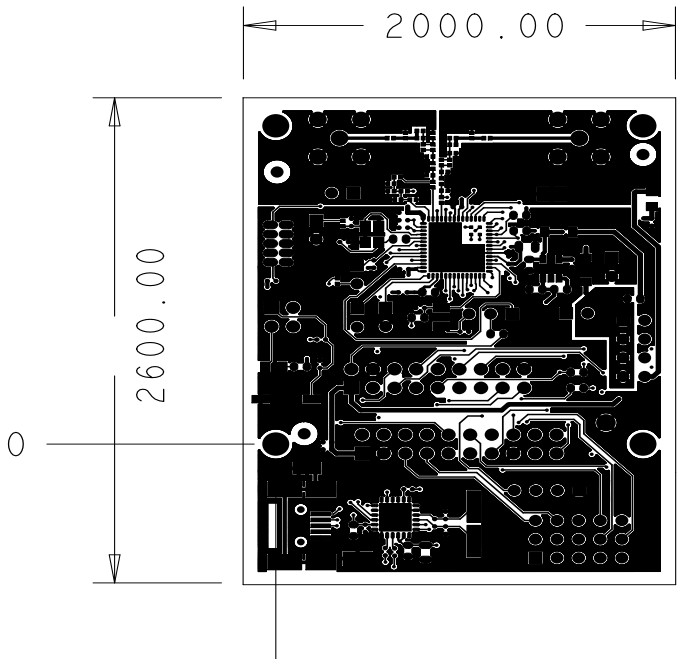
KW01-MRB Top Side (Component Side) Footprint
